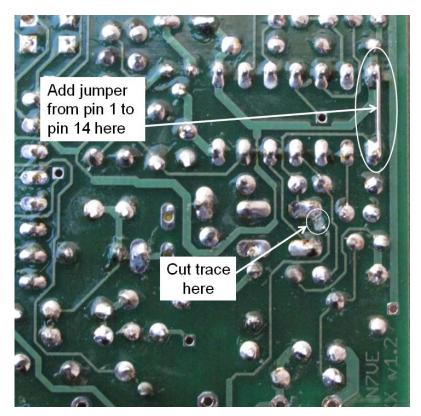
Cut and jumper modification. L1 trace cut, jumper added.
